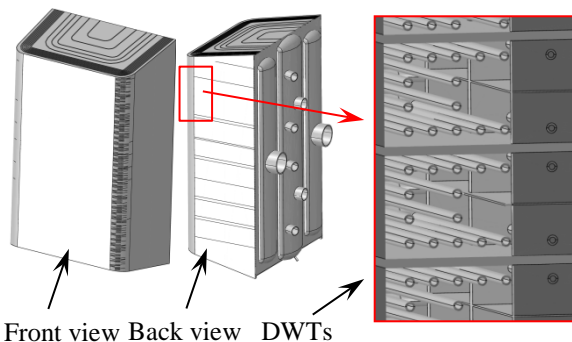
3D Geometric model of DEMO WCLL blanket module.
